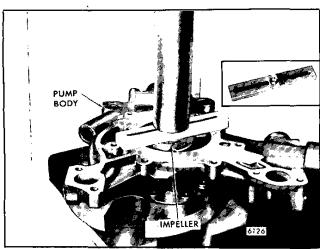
Installing Water Pump Impeller Using Tool J 29190-A
